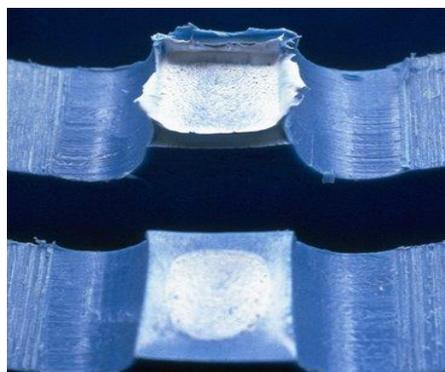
Tensile Testing of Butt Fusion Weld Specimen
